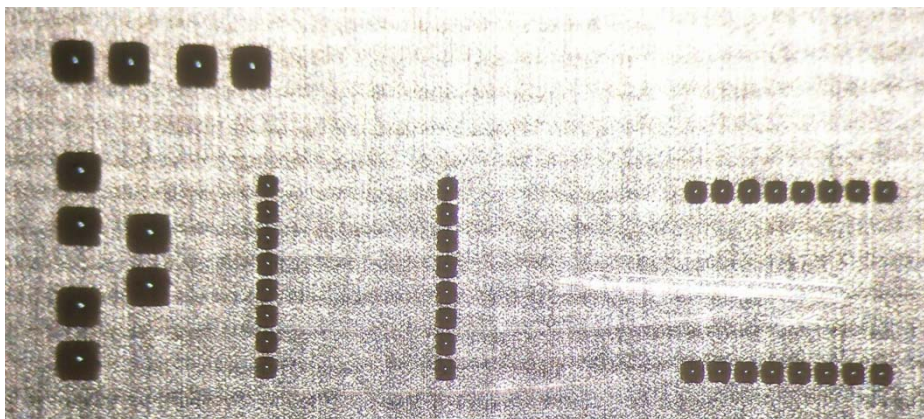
Printing of adhesive with 45vol% 6μm spheres. The small pad sizes are floating together, making it look like 8 larger pad in one row when it in fact it should be 16 smaller pads on each row. The largest pads are shown to the left in this picture.
